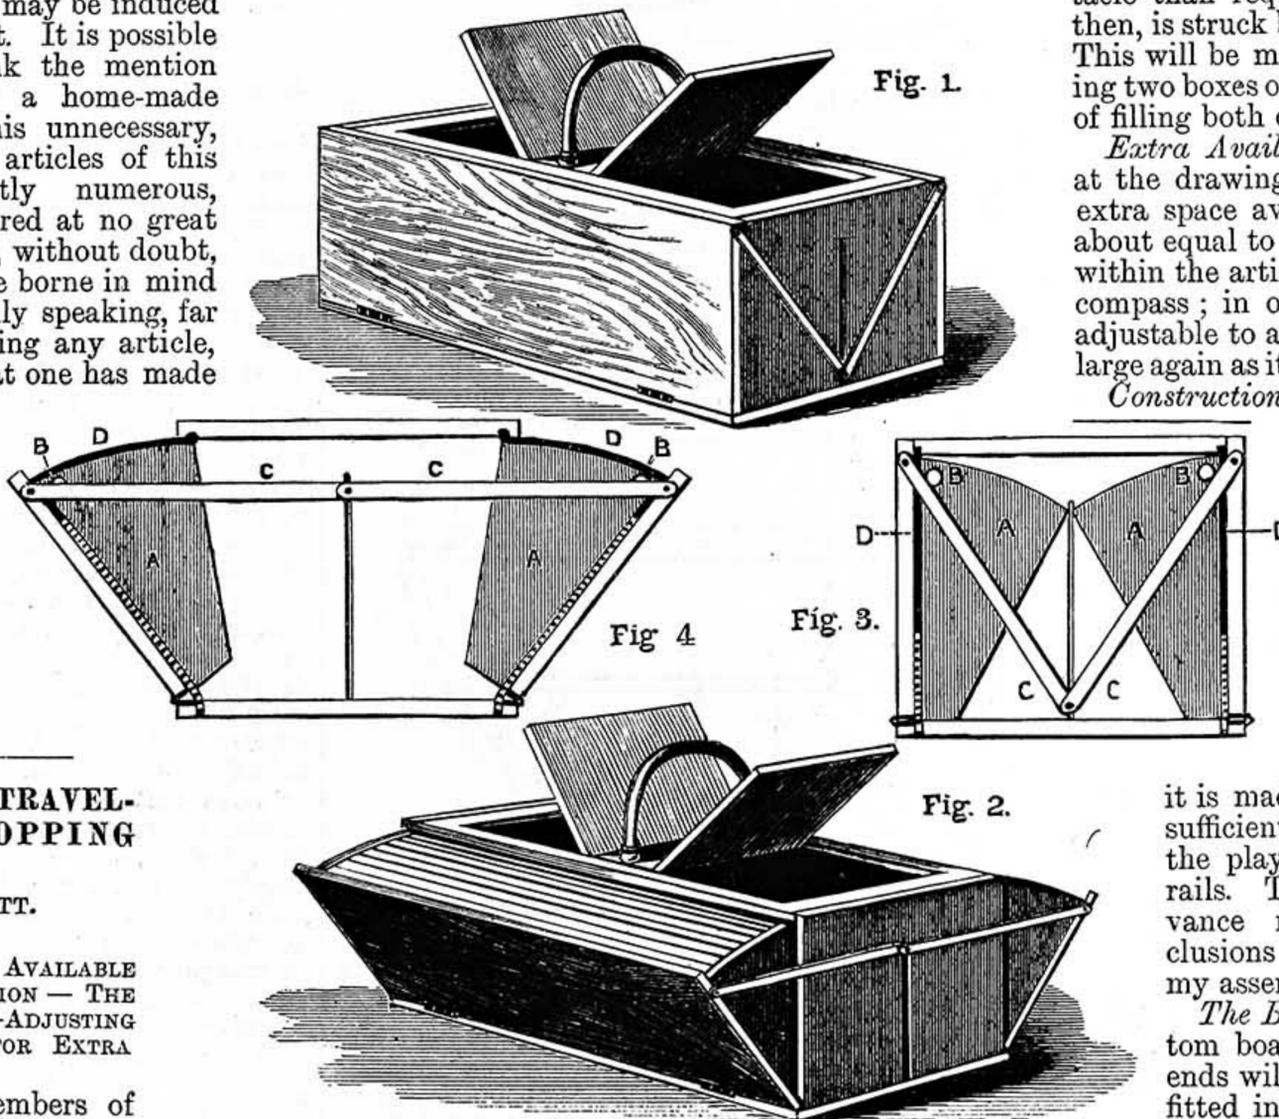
Casket with Lids open. Fig. 2.—Casket with Sides expanded. Fig. 3.—End Elevation of Fig. 1. Fig. 4.—Side Elevation of Fig. 2—A, A, A, A, Boards attached to Side Boards of Casket; B, B, Rods between Opposite Pairs of Boards; C, C, Movable Side Rails; D, D, Section of Laths to cover extra Openings. Dotted Lines connected with the last-named represent Elastic.
